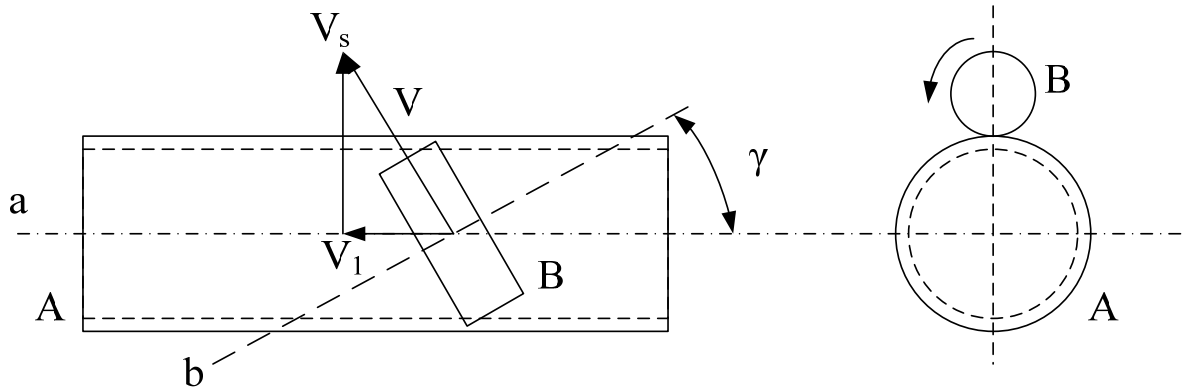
Sliding on the tooth flanks of the crossed-axes meshing.
